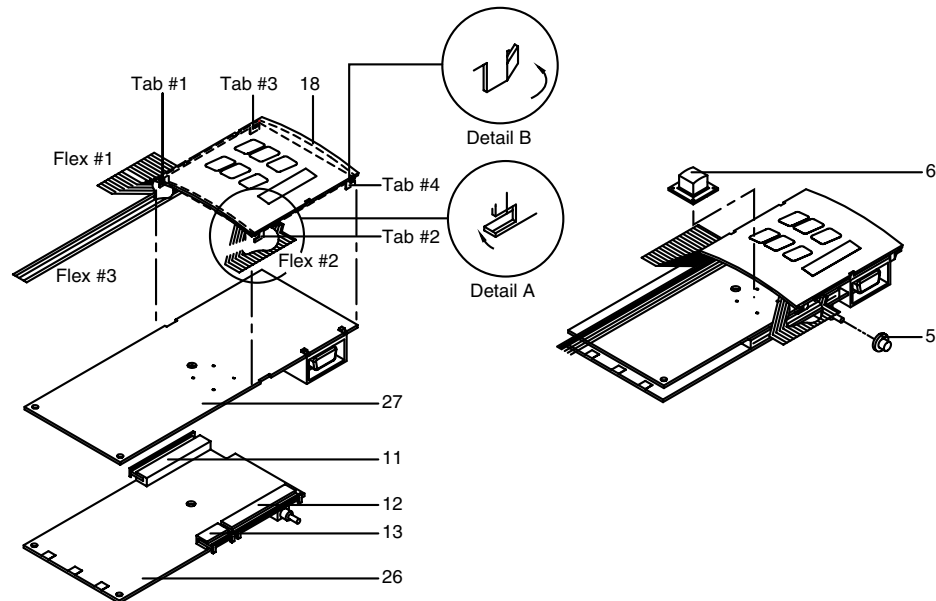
shows how to remove the N-20PA cover and display assembly.
